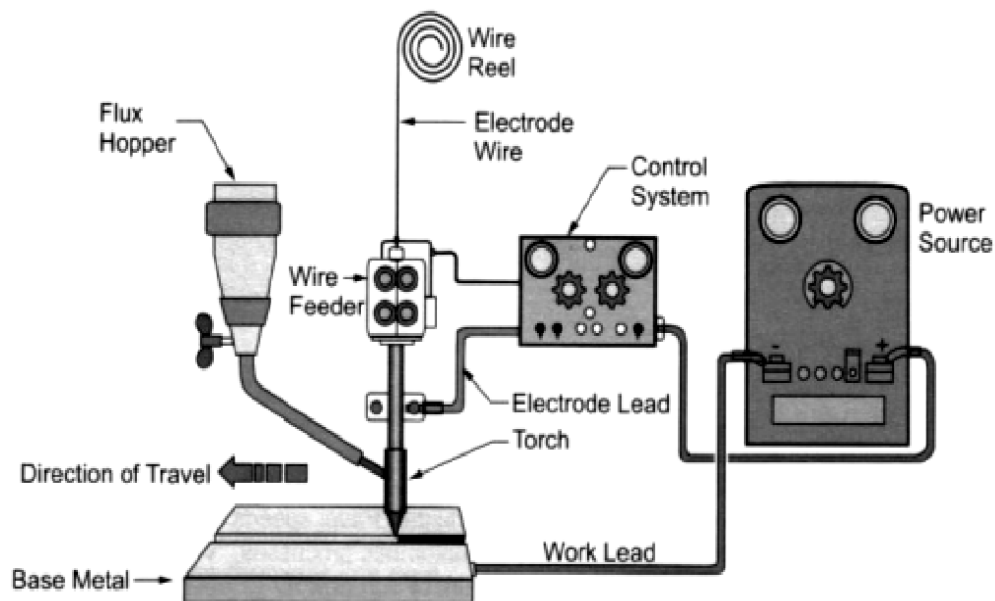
Equipment set-up for Single Wire Submerged Arc Welding
